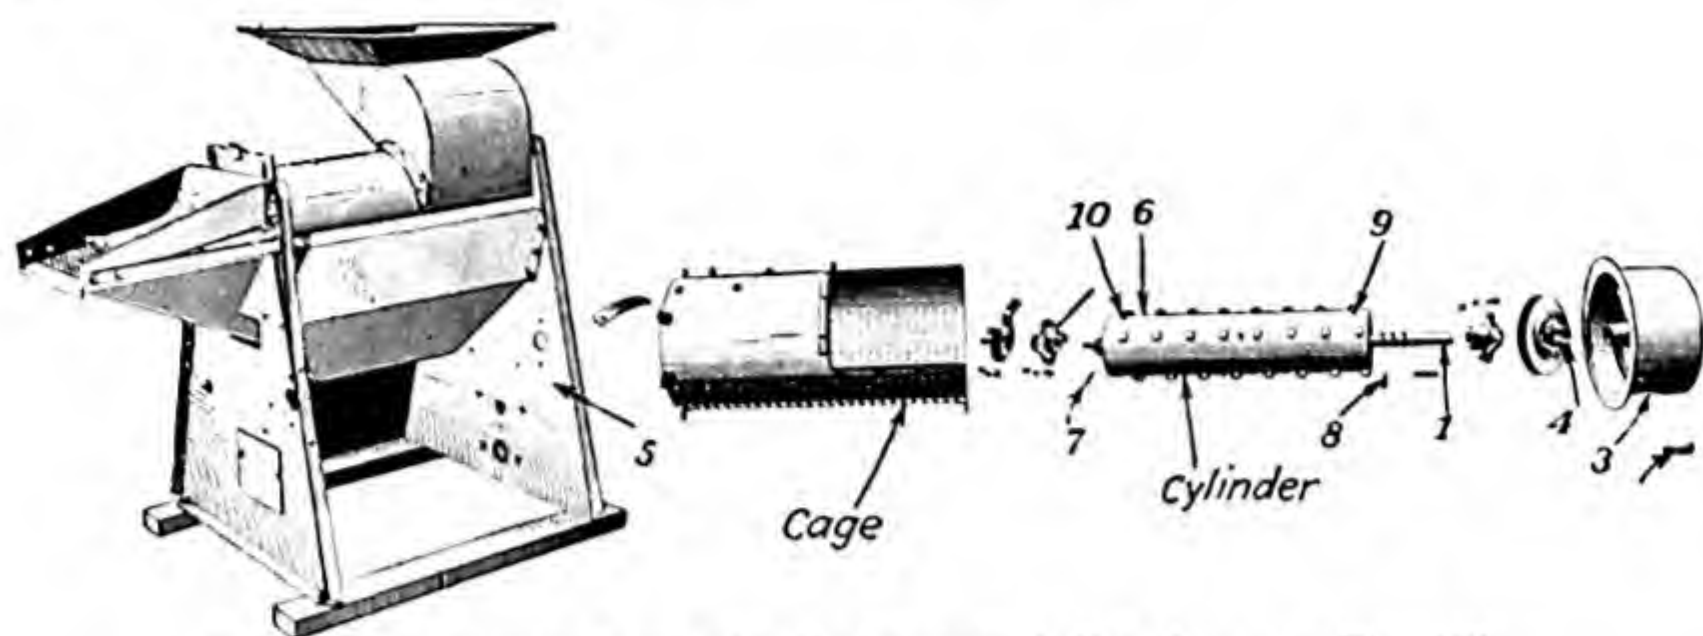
Exploded view of cylinder corn sheller shown in Fig. 590.
